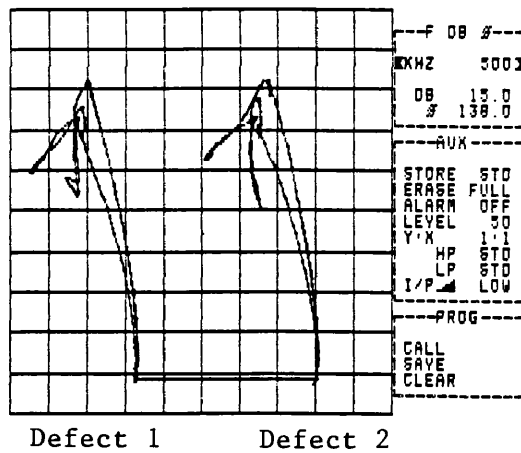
Ferrite-cored Horizontal Coil - Scan Over Weld Impurity Defects in Stainless Steel Weld Specimen 2
